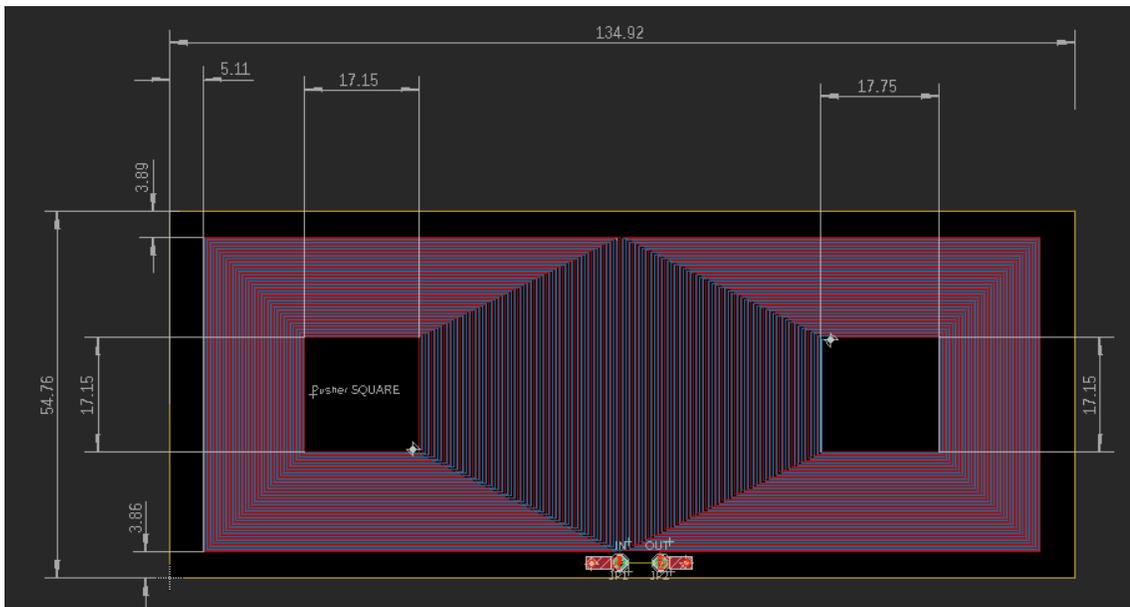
Pushing coil PCB, Red-Top layer, Blue-Bottom layer
